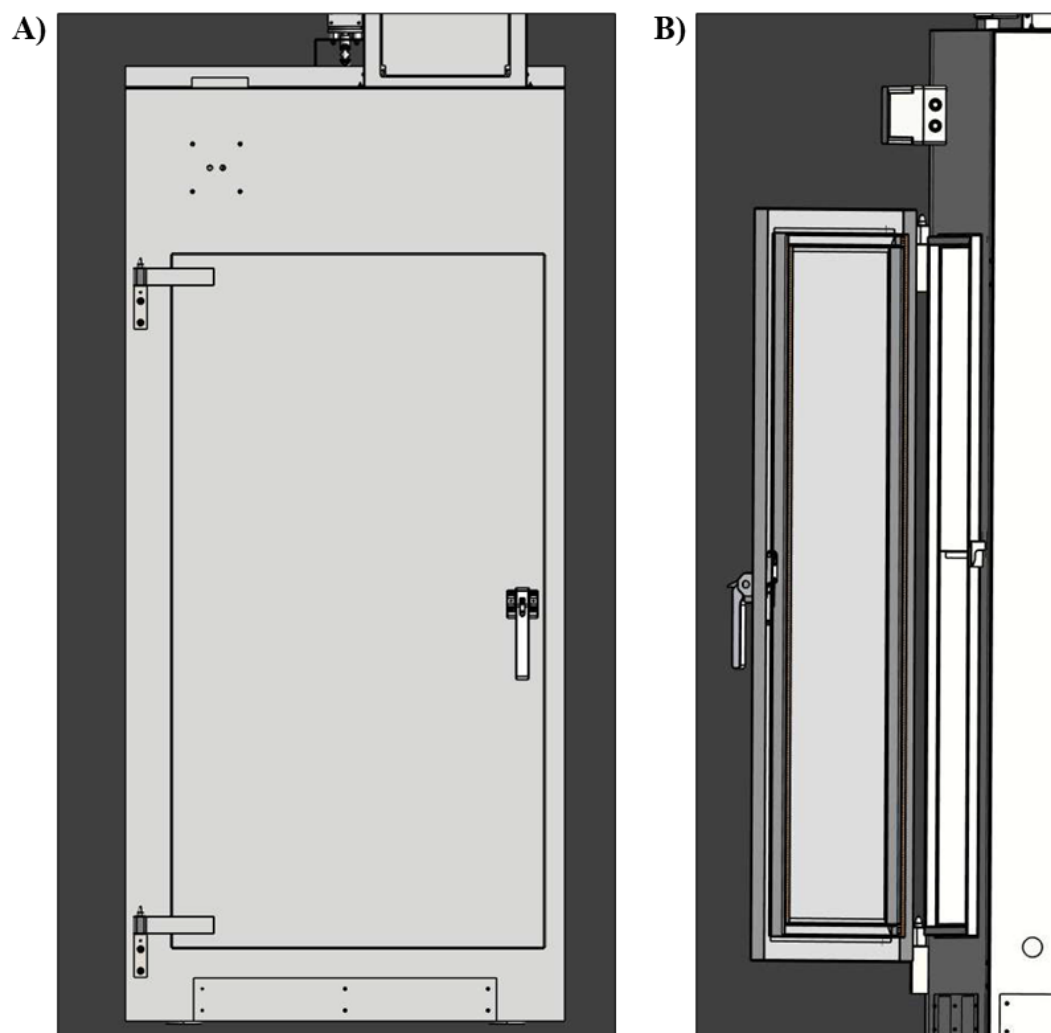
Frame Around Chamber Opening and Finger Stock Gasket Installed on the Door
